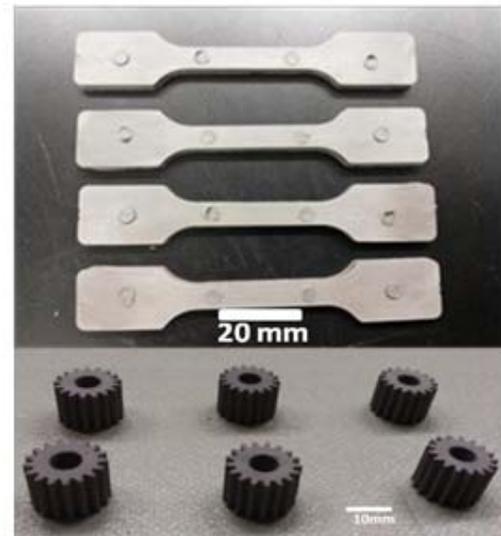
Defect free injection molded (a) dogbone shape sample (b) gear part.
